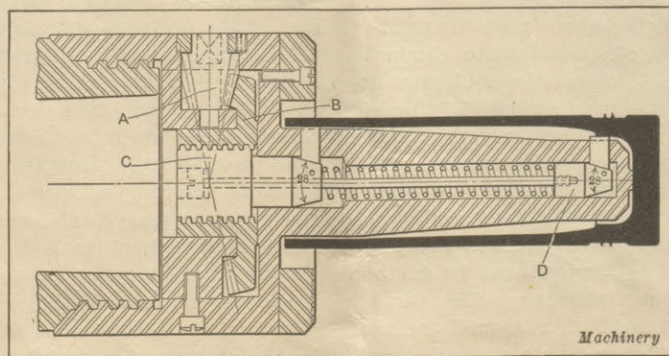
Method of holding Shrapnel Shells for First Operation on a 22-inch Turret Lathe
